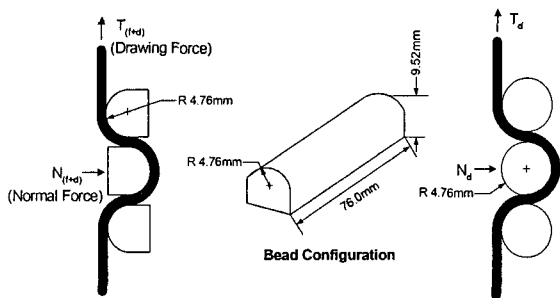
Fixed bead (a) and roller bead (b) configuration of drawbead simulator
